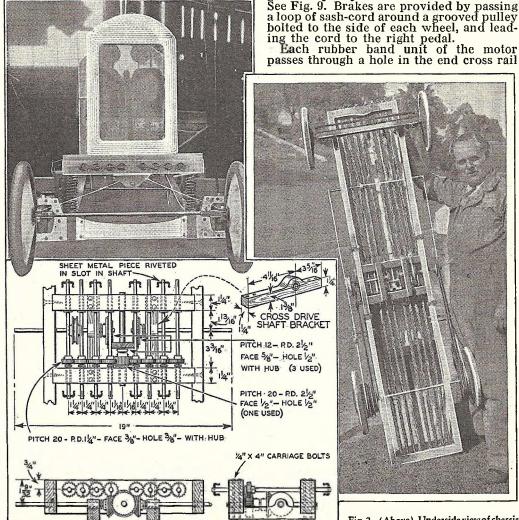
(Above) Underside view of chassis shows "motor" wound up ready to de-
